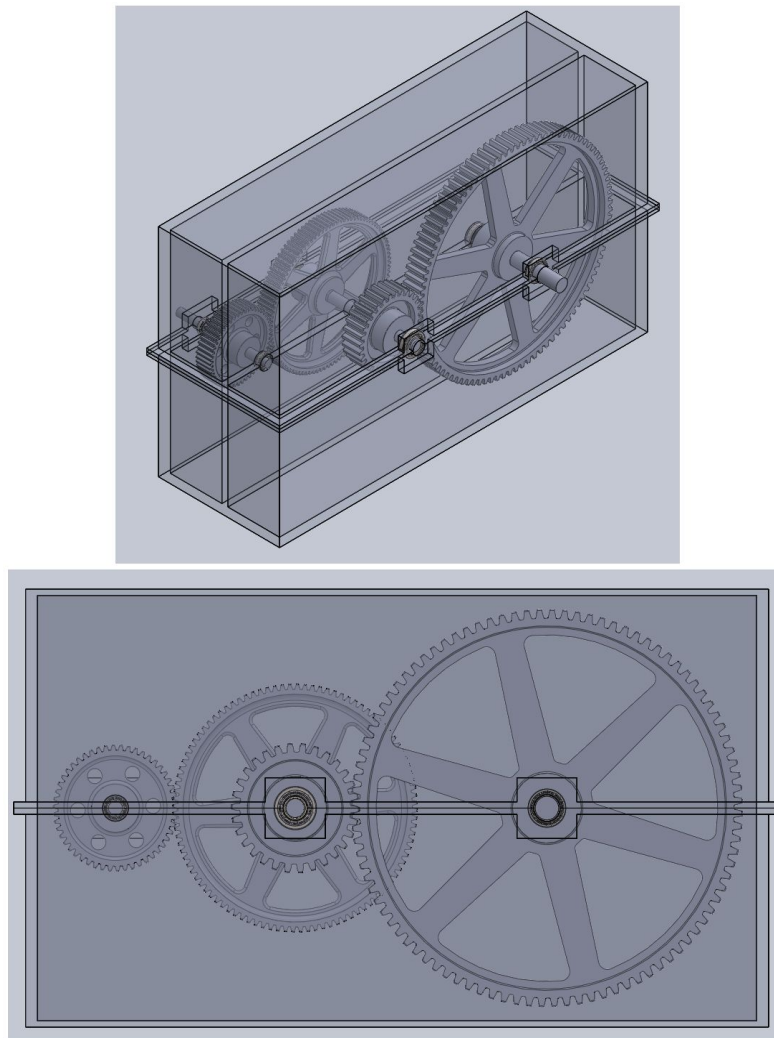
Gearbox CAD Model with Horizontal Shafts (Isometric View (Top of Figure 21) and Right-side View (Bottom of Figure 21))
